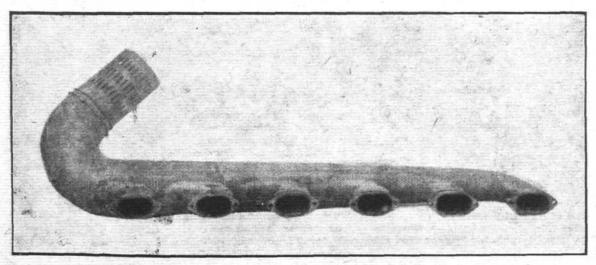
The exhaust pipe of the 260 h.p. Mercedes I engine. I 1
